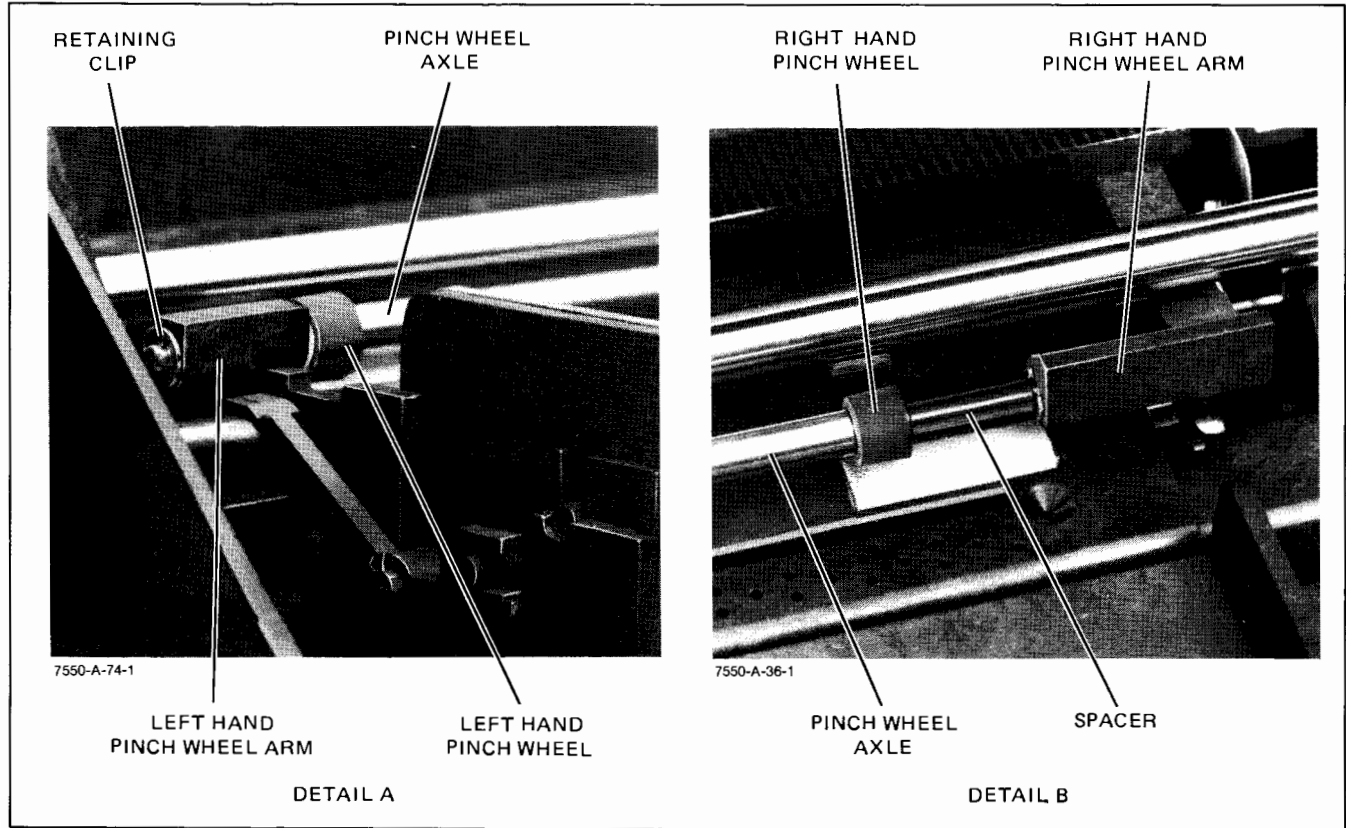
Pinch Wheel and Pinch Wheel Axle Removal
